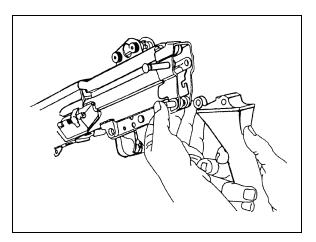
Replacement of the buttstock and buffer assembly group.
